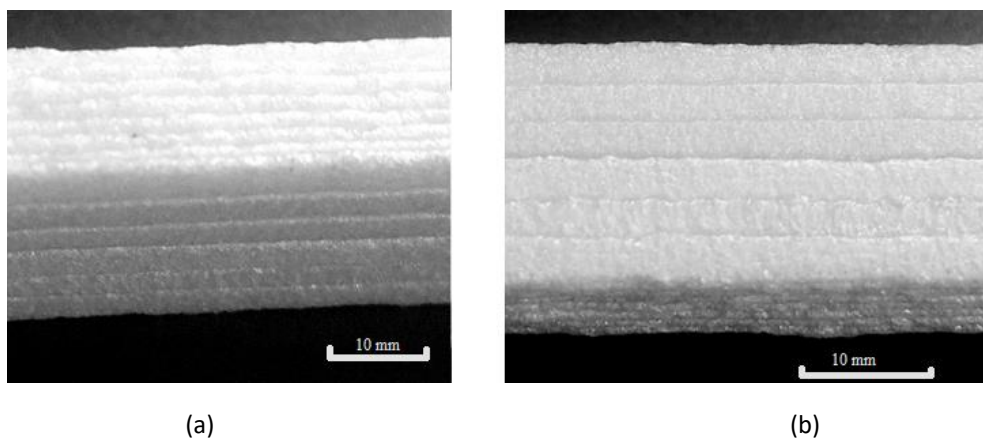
Appearance of the surface of the 3D- printed PETG foam: a - view of the surface from above; b - view of the surface of the built platform.
